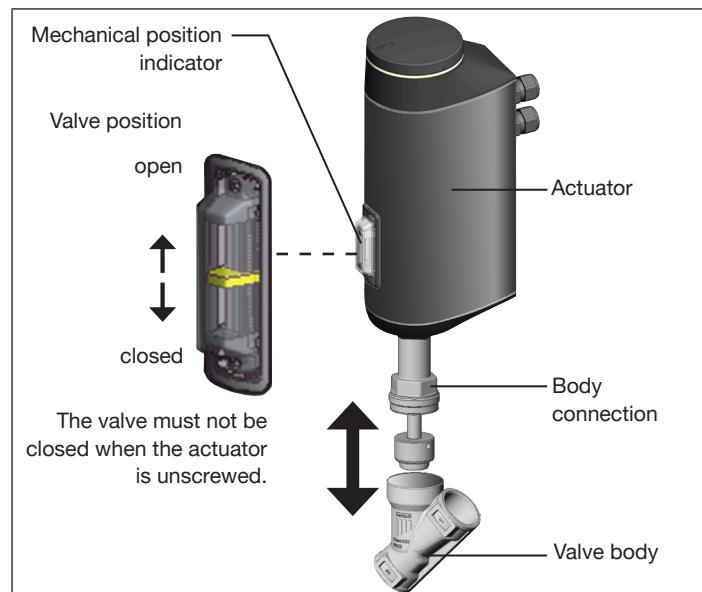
Installation of electromotive actuator (example angle seat valve)
